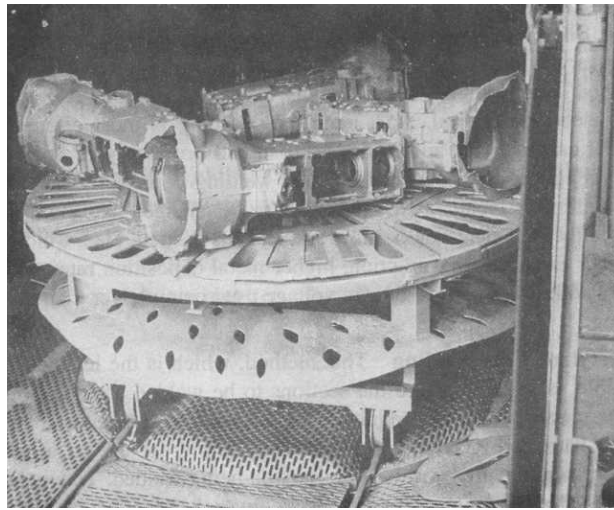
Inside view of shot blasting machine (Chamber type)
